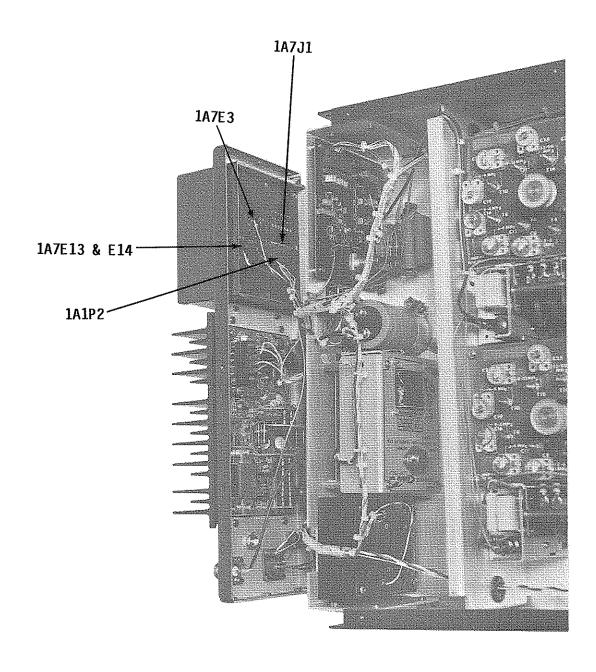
SHEET 5 of 19, FILTER MODULE DISASSEMBLY
